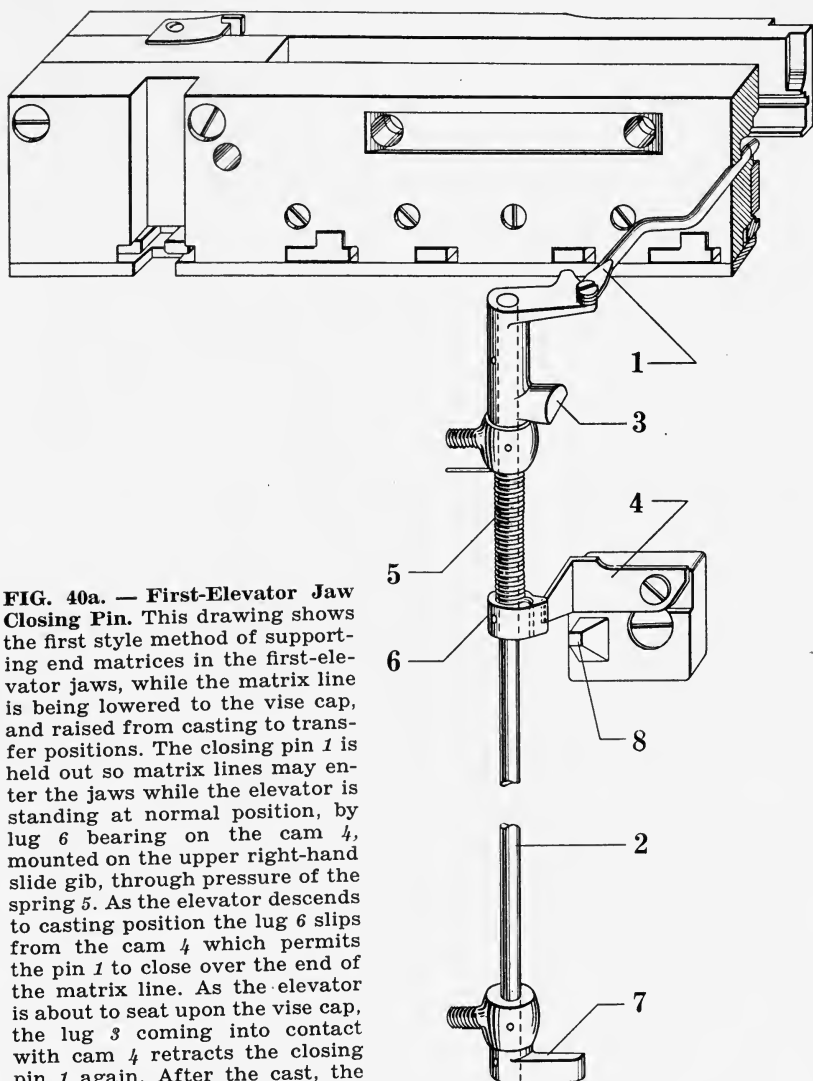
First-Elevator Jaw Closing Pin. This drawing shows the first style method of supporting end matrices in the first-elevator jaws, while the matrix line is being lowered to the vise cap, and raised from casting to transfer positions. The closing pin 1 is held out so matrix lines may enter the jaws while the elevator is standing at normal position, by lug 6 bearing on the cam 4, mounted on the upper right-hand slide gib, through pressure of the spring 5. As the elevator descends to casting position the lug 6 slips from the cam 4 which permits the pin 1 to close over the end of the matrix line. As the elevator is about to seat upon the vise cap, the lug 3 coming into contact with cam 4 retracts the closing pin 1 again. After the cast, the elevator rises, and pin 1 closes through pressure of the spring 5.
